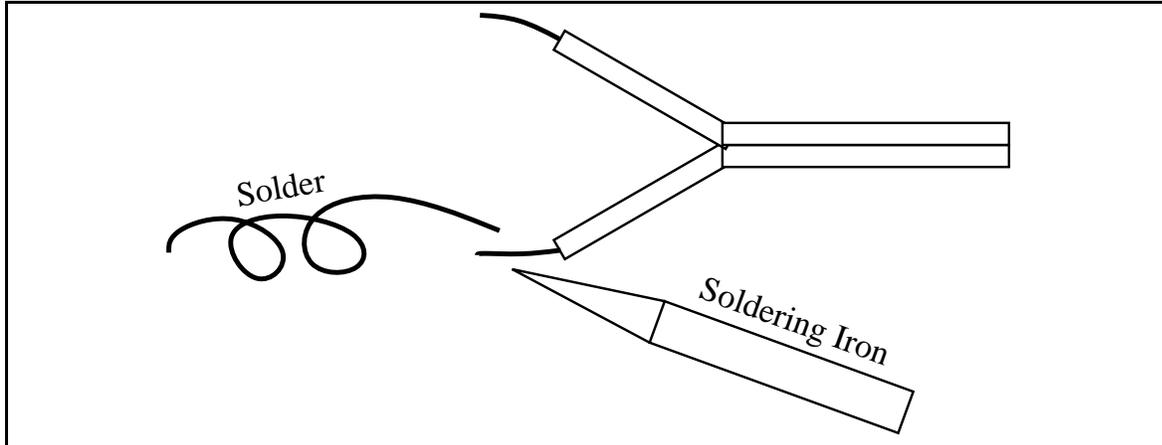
through 1.30 illustrate the recommended method for wiring to a connector plug. When assembled properly, this method will provide for a sturdy, well-insulated connector that will be reliable over a long period of use.
